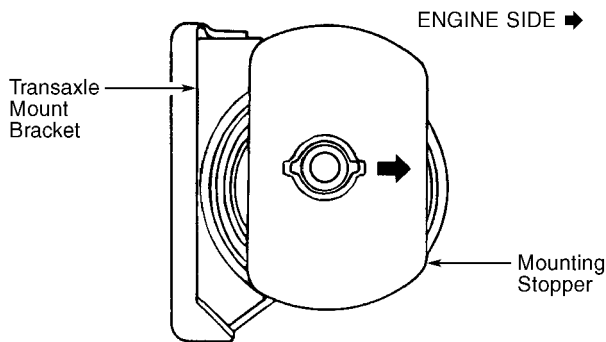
Installing Transaxle Assembly Mounting Stopper (3000GT)
